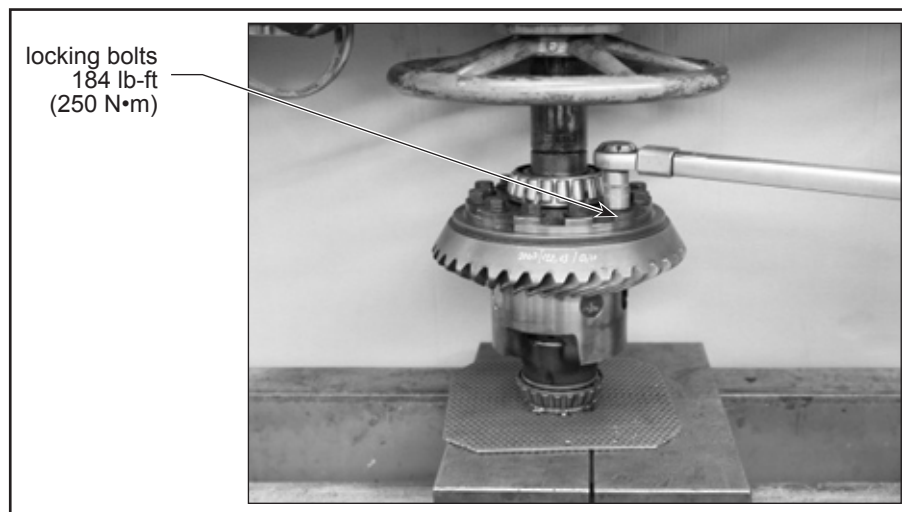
Mounting of Crown Wheel on Differential Carrier
